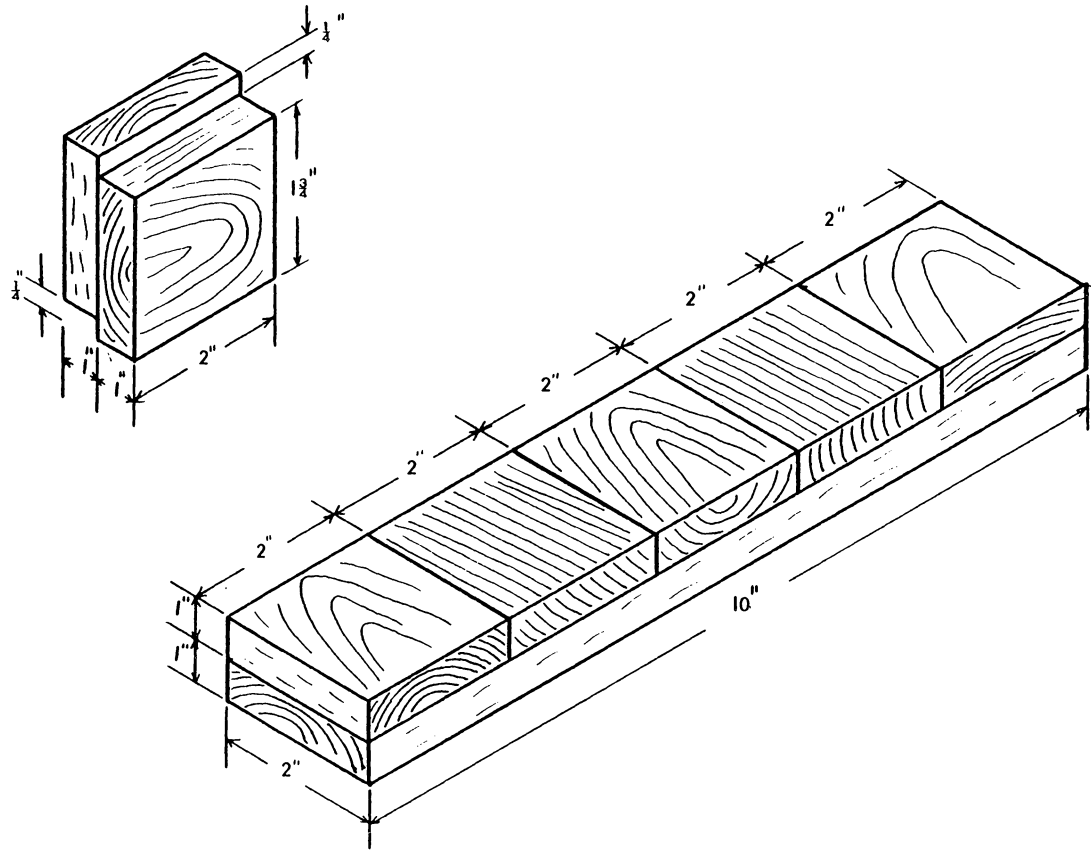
Schematic Diagram of Layed Up Panel for Glued Shearblocks and Machined Shearblock
